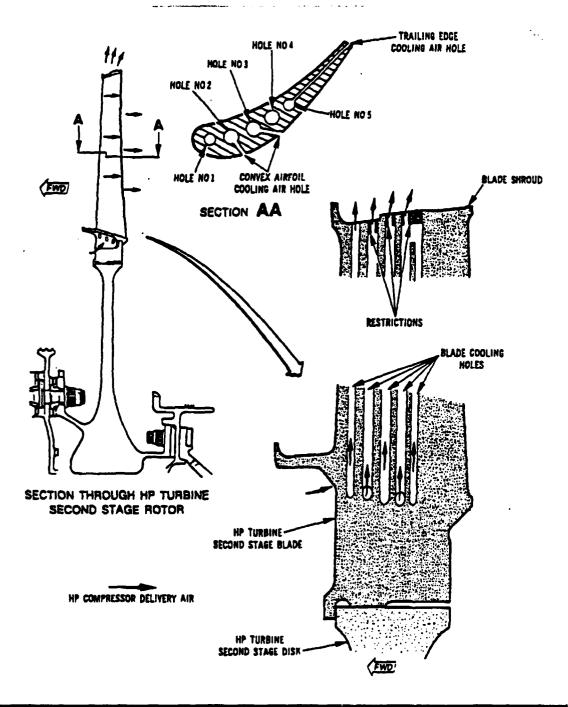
Details of High Pressure Turbine, Second Stage Blades
